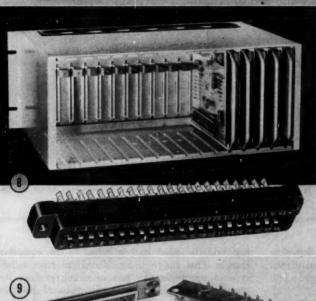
Typical printed-circuit board receptacle and computer application. Designed to connect with boards having printed conductors on both sides, the receptacle has spring contacts on both sides of the opening.
